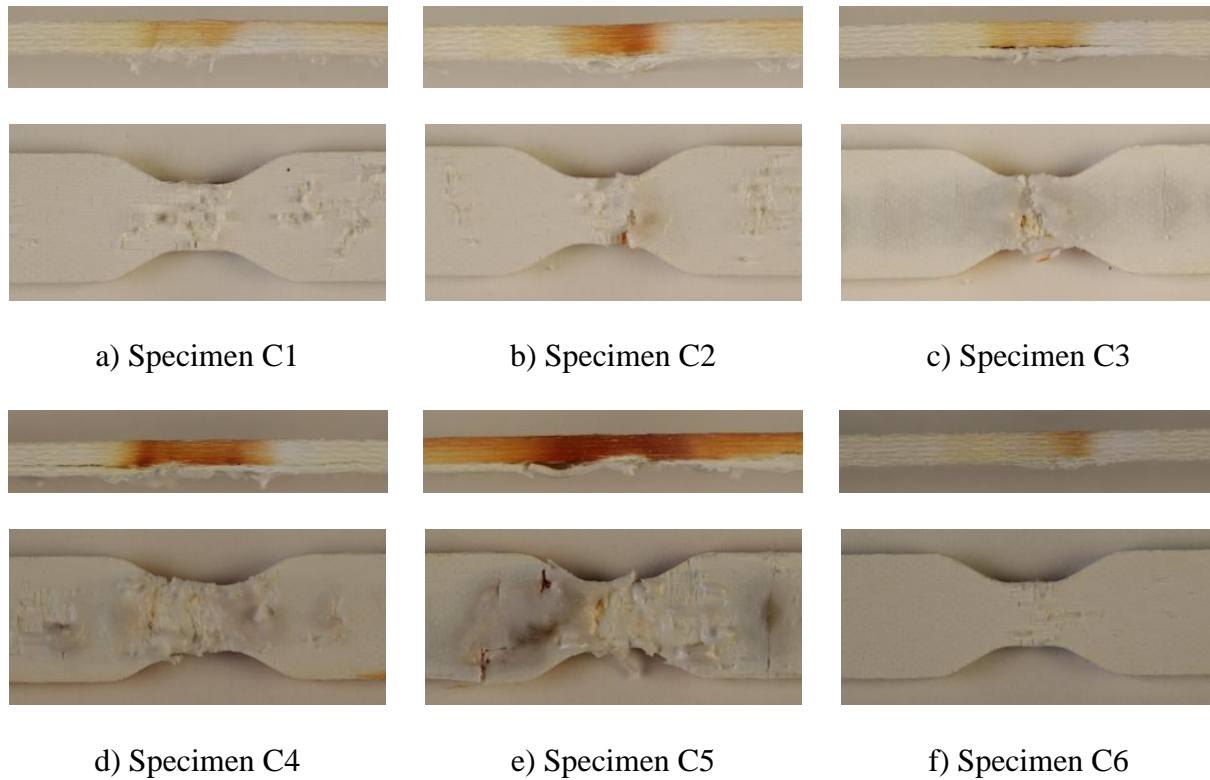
Post-test observation of the damaged specimens (heated front face and one side face)
